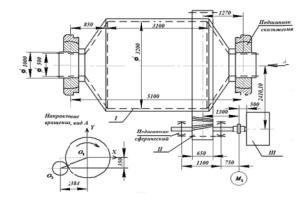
Constructive and kinematic scheme of the spherical mill with the gear wreath on the drum and the gearless electric drive: I – drum with the gear wreath z_K = 278; II – shaft driving with a gear wheel z_{III} = 22; III – the electric motor synchronous n_{δ} = 250 cap/min; M_I – the coupling connecting
